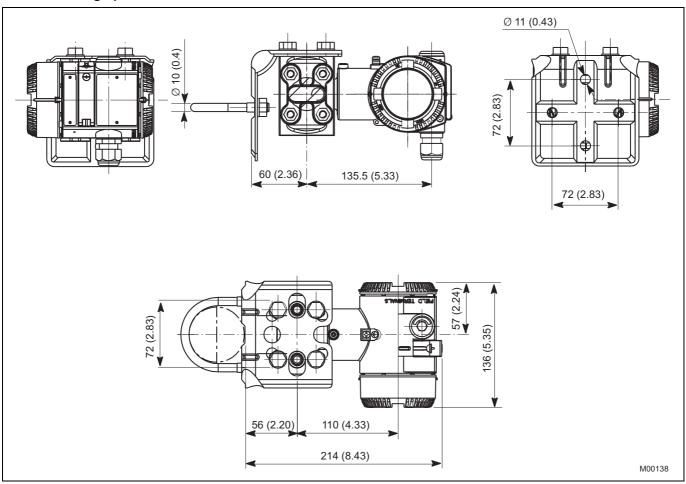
Dimensions in mm (inches), deviations in the drawing are possible
